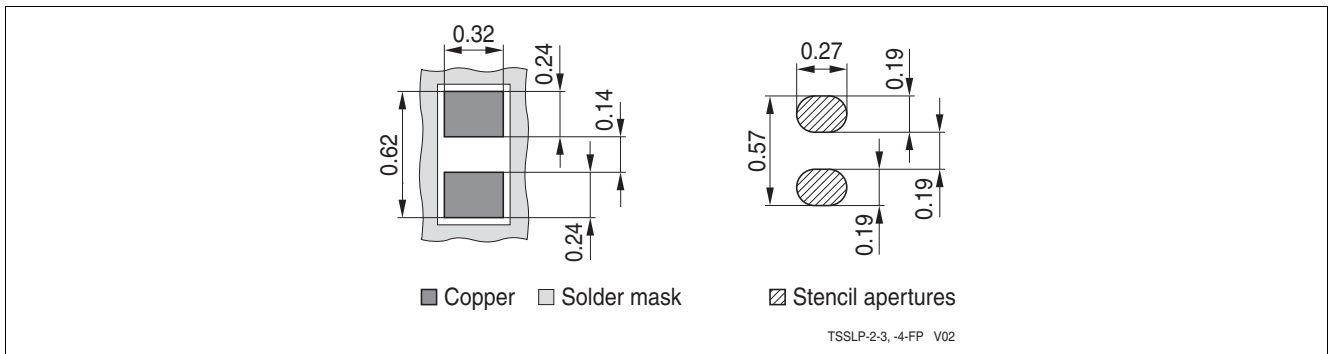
TSSLP-2-3: Footprint (dimension in mm)
